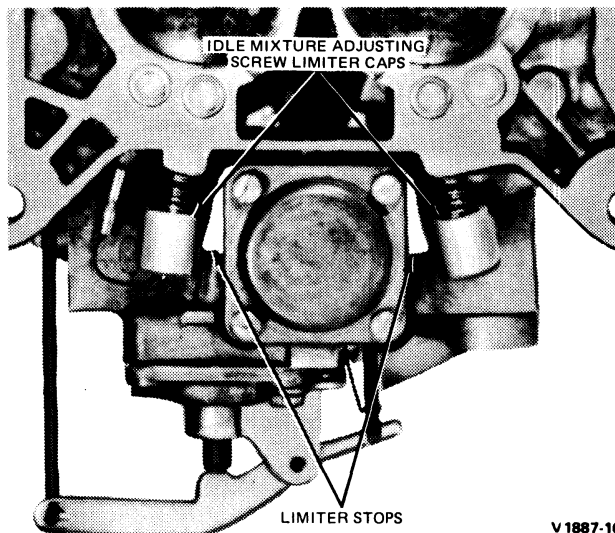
Idle Fuel Mixture Adjusting Screw Limiters and Stops
